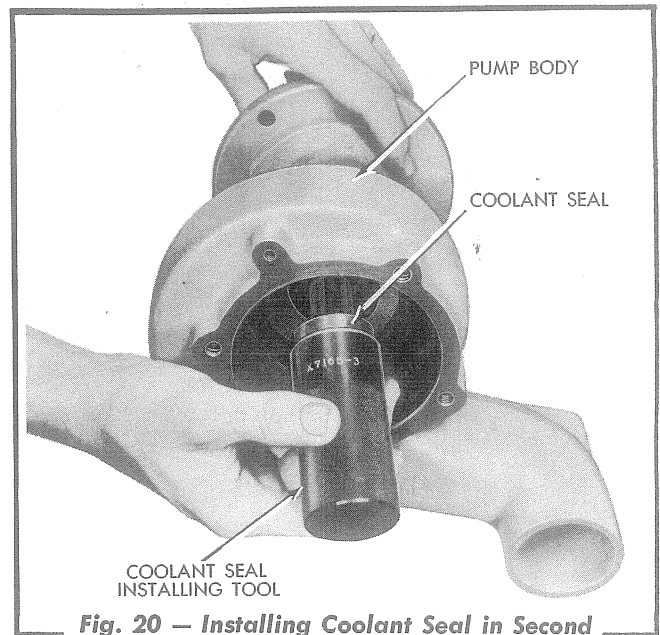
Installing Coolant Seal in Second Type Water Pump
